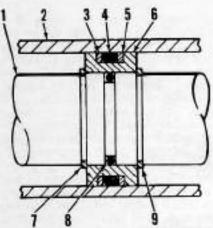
Diagram showing correct placement of "O" rings and back-up rings on piston rod of steering cylinder used on David Brown front drive axies.
